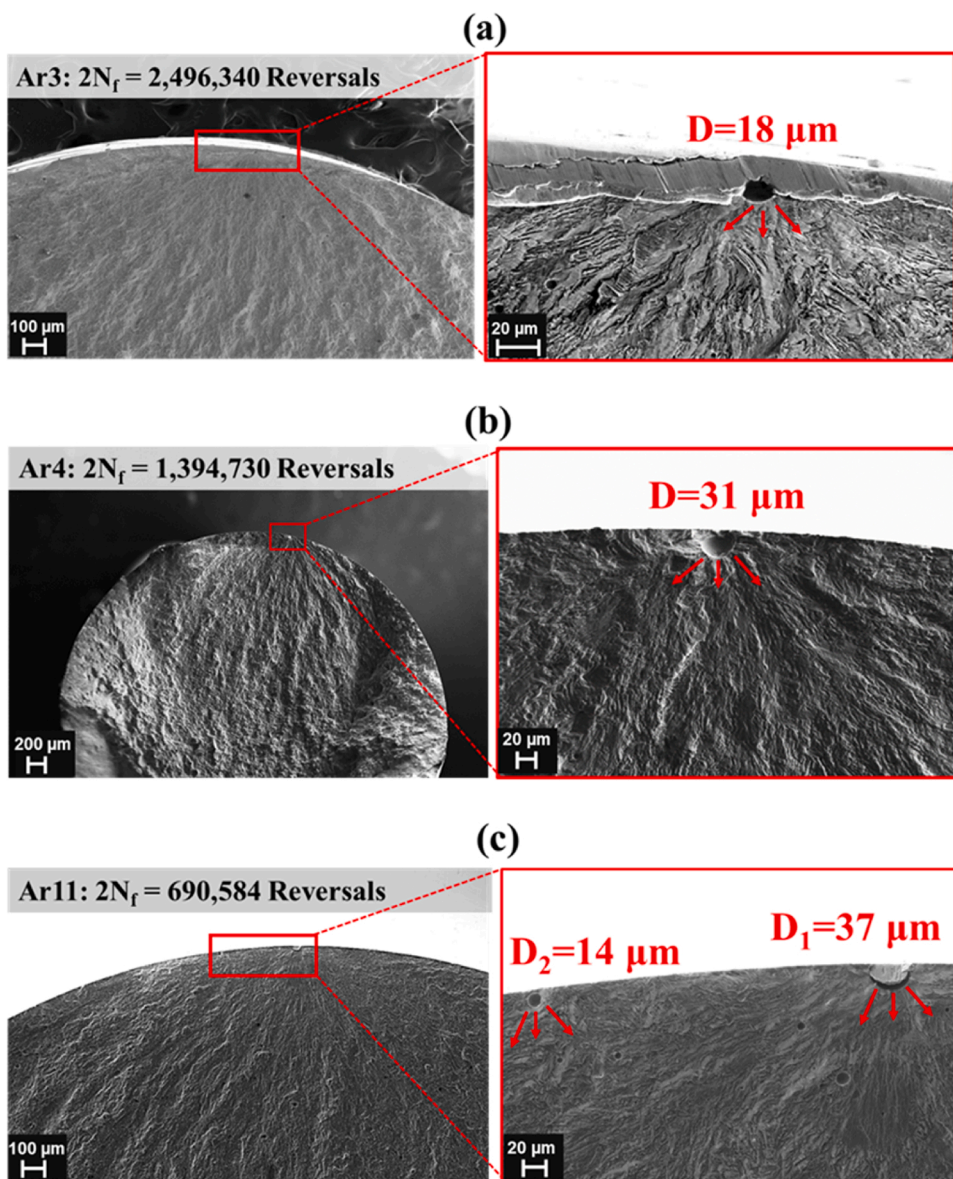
Fracture surfaces of HT-Ar specimens at 0.0025 mm/mm strain amplitude: (a) specimen "Ar3" with 2,496,340 reversals to failure, (b) specimen "Ar4" with 1,394,730 reversals to failure, and (c) specimen "Ar11" with 690,584 reversals to failure.
